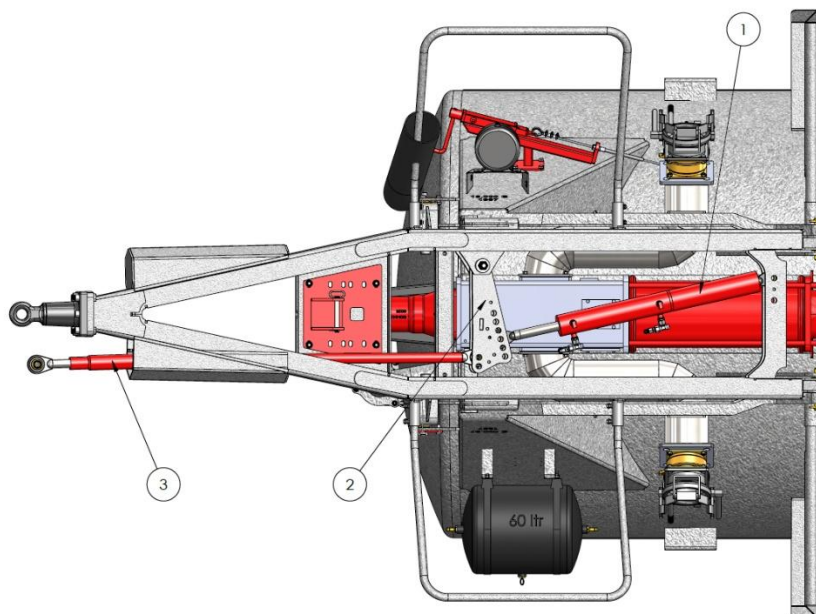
Steering system on a machine with one hydraulically steered axle
